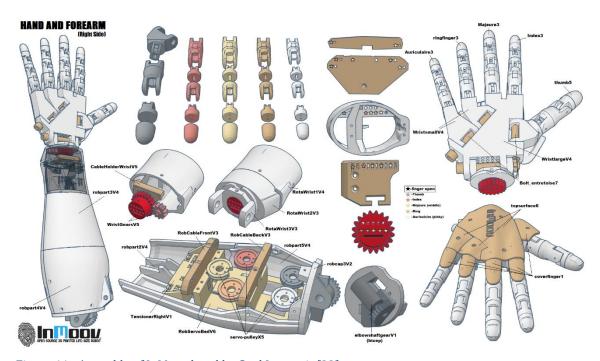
Assembly of InMoov hand by Gael Langevin[22]
